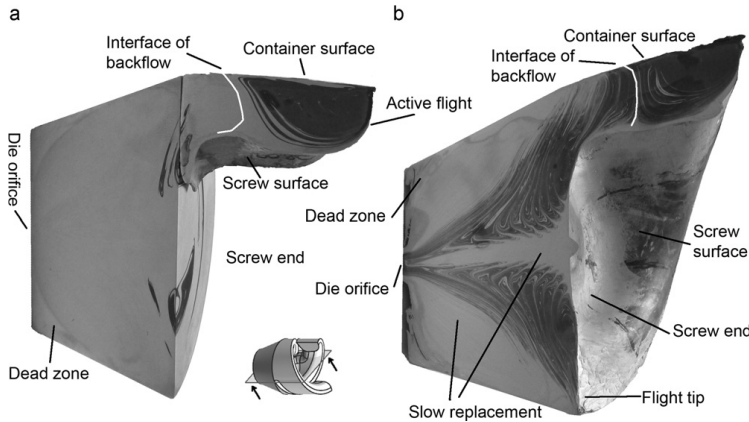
Etched aluminium plugs from screw extrusion using a double flight screw, illustrating the material flow. (a): after 30 s of contrast material feeding; (b): after 60s. From [65].
